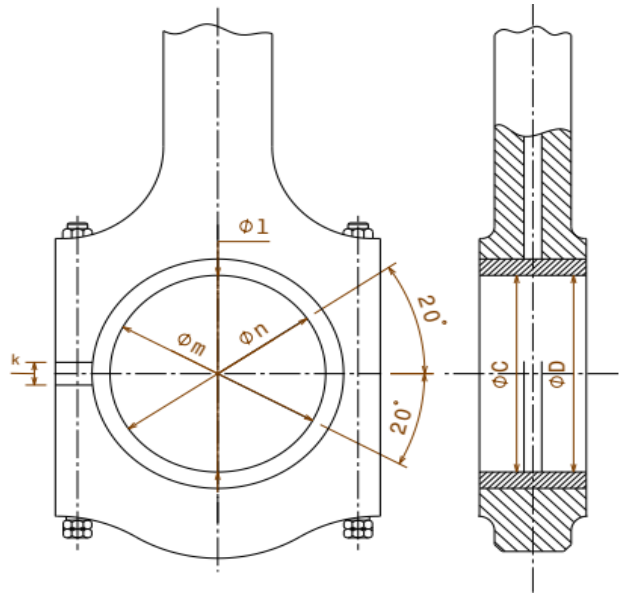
37 Measurement of connecting rod bearing (IS standard)
